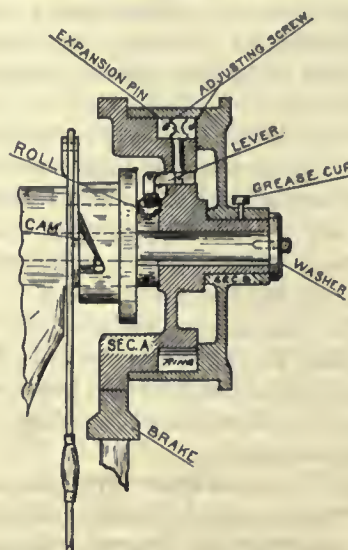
FRICTION CLUTCH FOR POWER HAMMER
